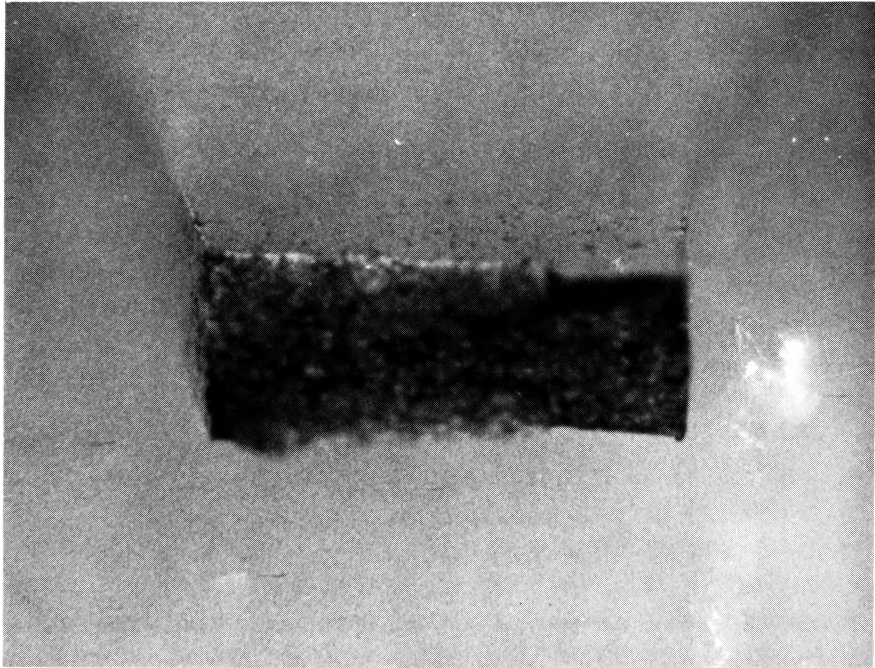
Fracture surface of as received baseline fatigue specimen 1-04 (7,640 cycles).
